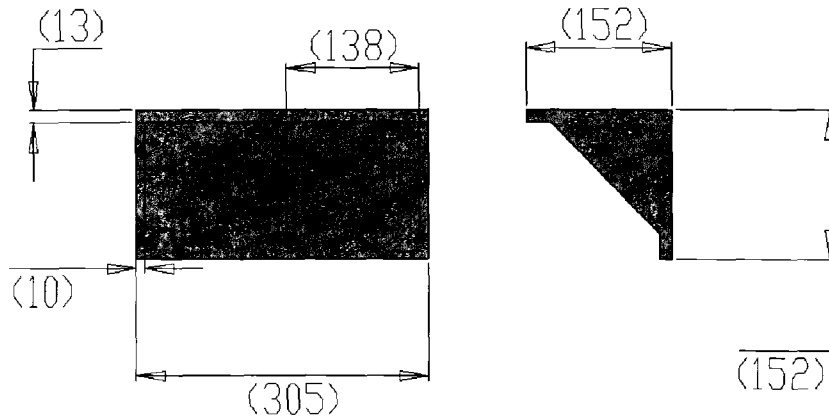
Dimensions in Millimeters of Brackets Loading Rams to I-Beam (NTS)
